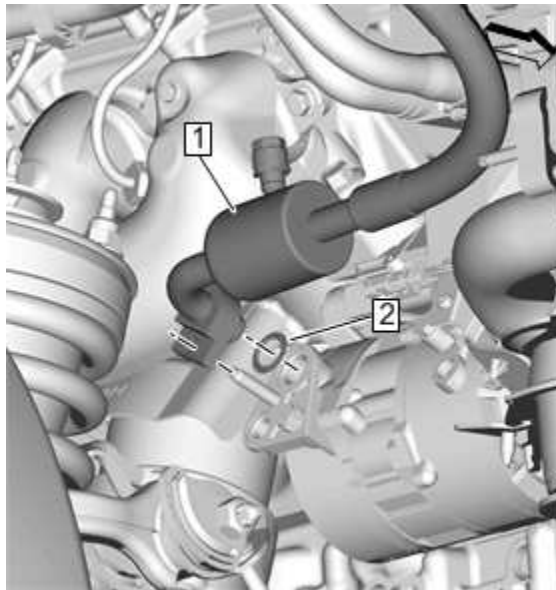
Air Conditioning Compressor Hose At Air Conditioning Compressor
